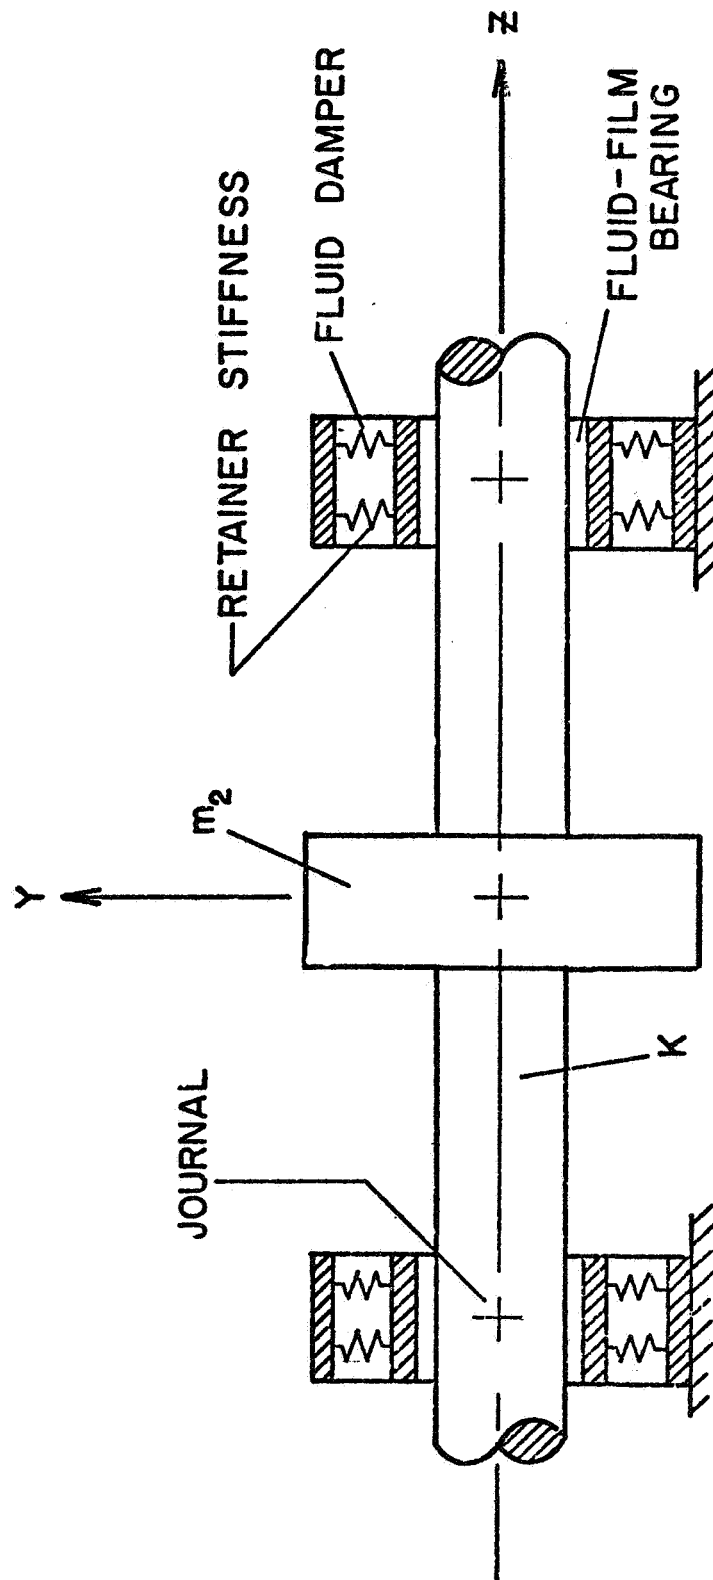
ROTOR SYSTEM SUPPORTED ON FLUID-FILM JOURNAL BEARINGS
